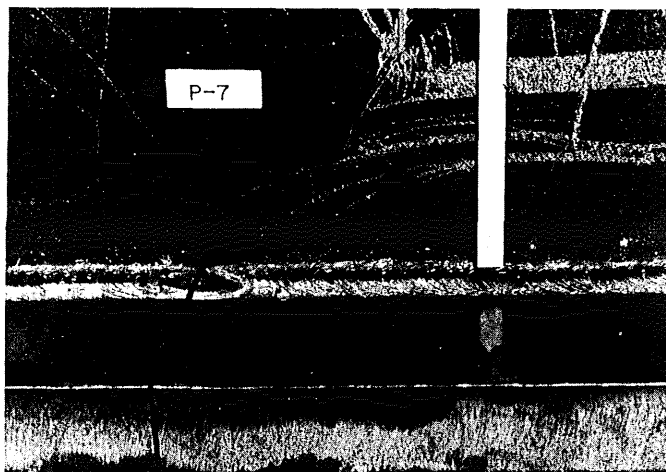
TYPICAL FRACTURES OF BUTT-WELDED JOINTS
